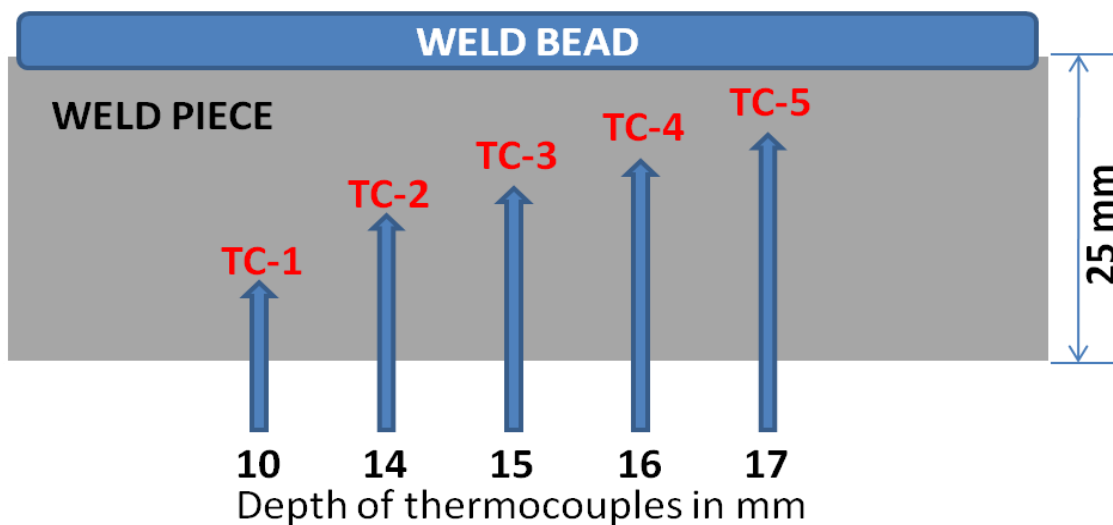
Submerged arc welds bead on plate thermocouples positioning
